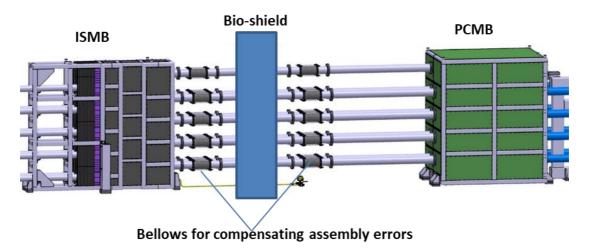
Bellows are inserted between the bio-shield plug and ISMB/PCMB in order to compensate the assembly error.
